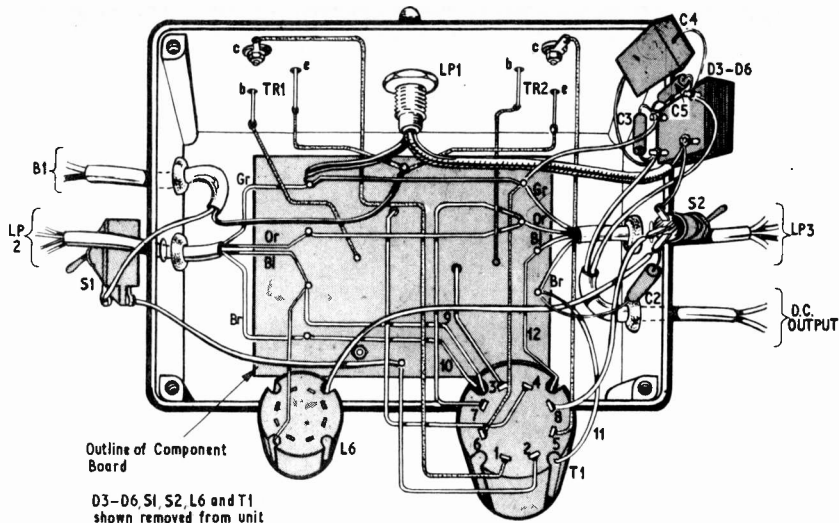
Interwiring details of case mounted components and the board of Fig. 2
